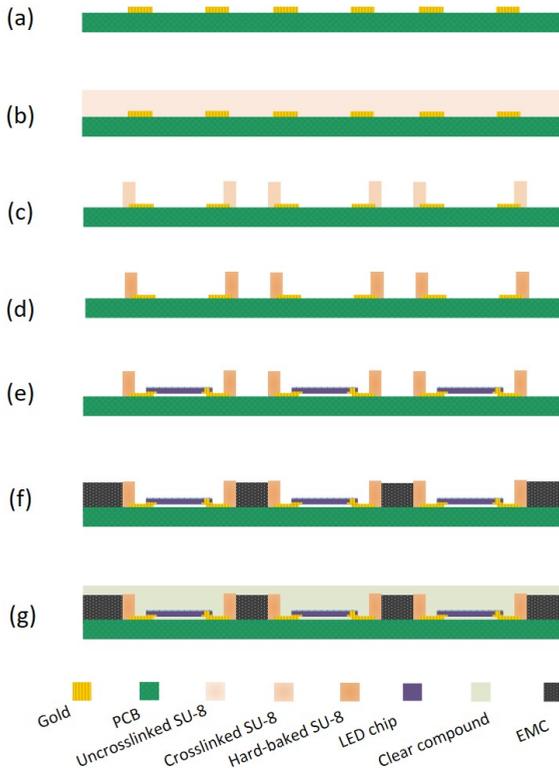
A detailed process flow of TPVH-N-PCB process. (a) The PCB substrate, (b) SU-8 dry film lamination on PCB, (c) the formation of SU-8 ring structures, (d) hard baking, (e) assembly of LEDs, (f) film assisted molding, (g) clear compound molding.
